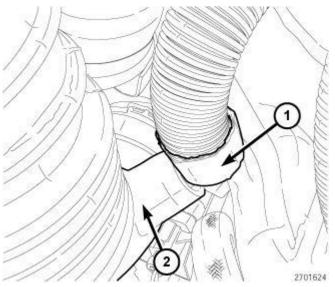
Air Cleaner Housing, Worm Clamp, Air Cleaner Outlet Tube, MAF Sensor & IAT Sensor Courtesy of CHRYSLER LLC
